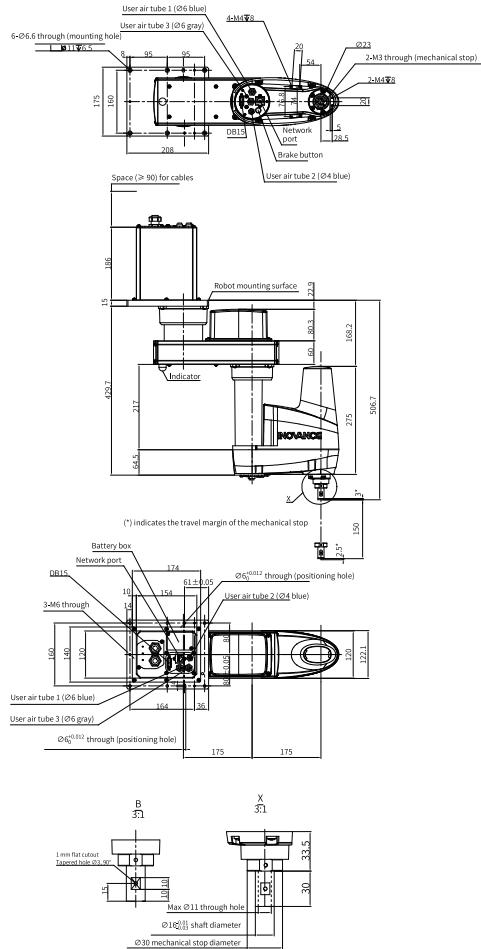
IR-TS4-35Z15S3 outline dimensions
